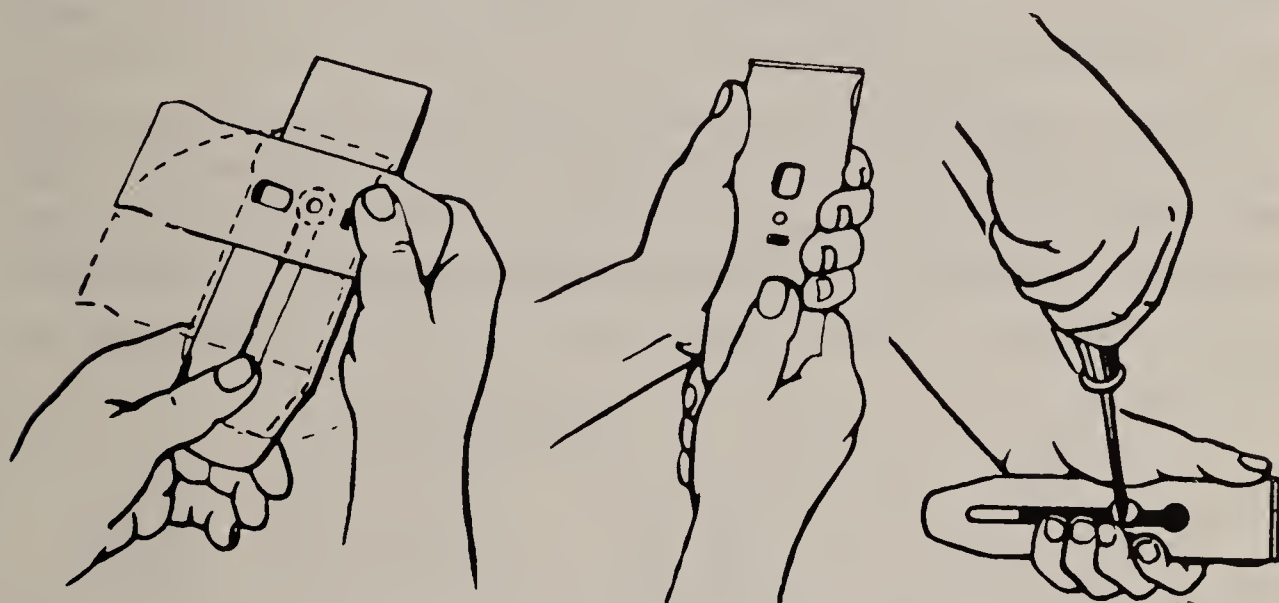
Plane iron and plane-iron cap assembly. In the assembly process first lay the plane-iron cap on the flat side of the plane iron with screw in the slot, then turn the plane-iron cap around as illustrated. Before tightening the screw, be careful to adjust the plane-iron cap with plane iron.
